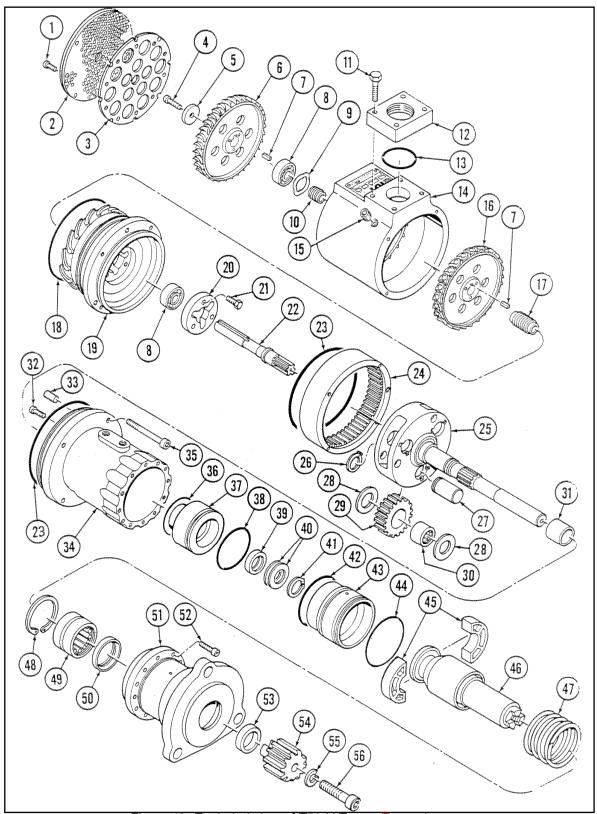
Exploded view of T50-Y TURBOTWIN air starter
